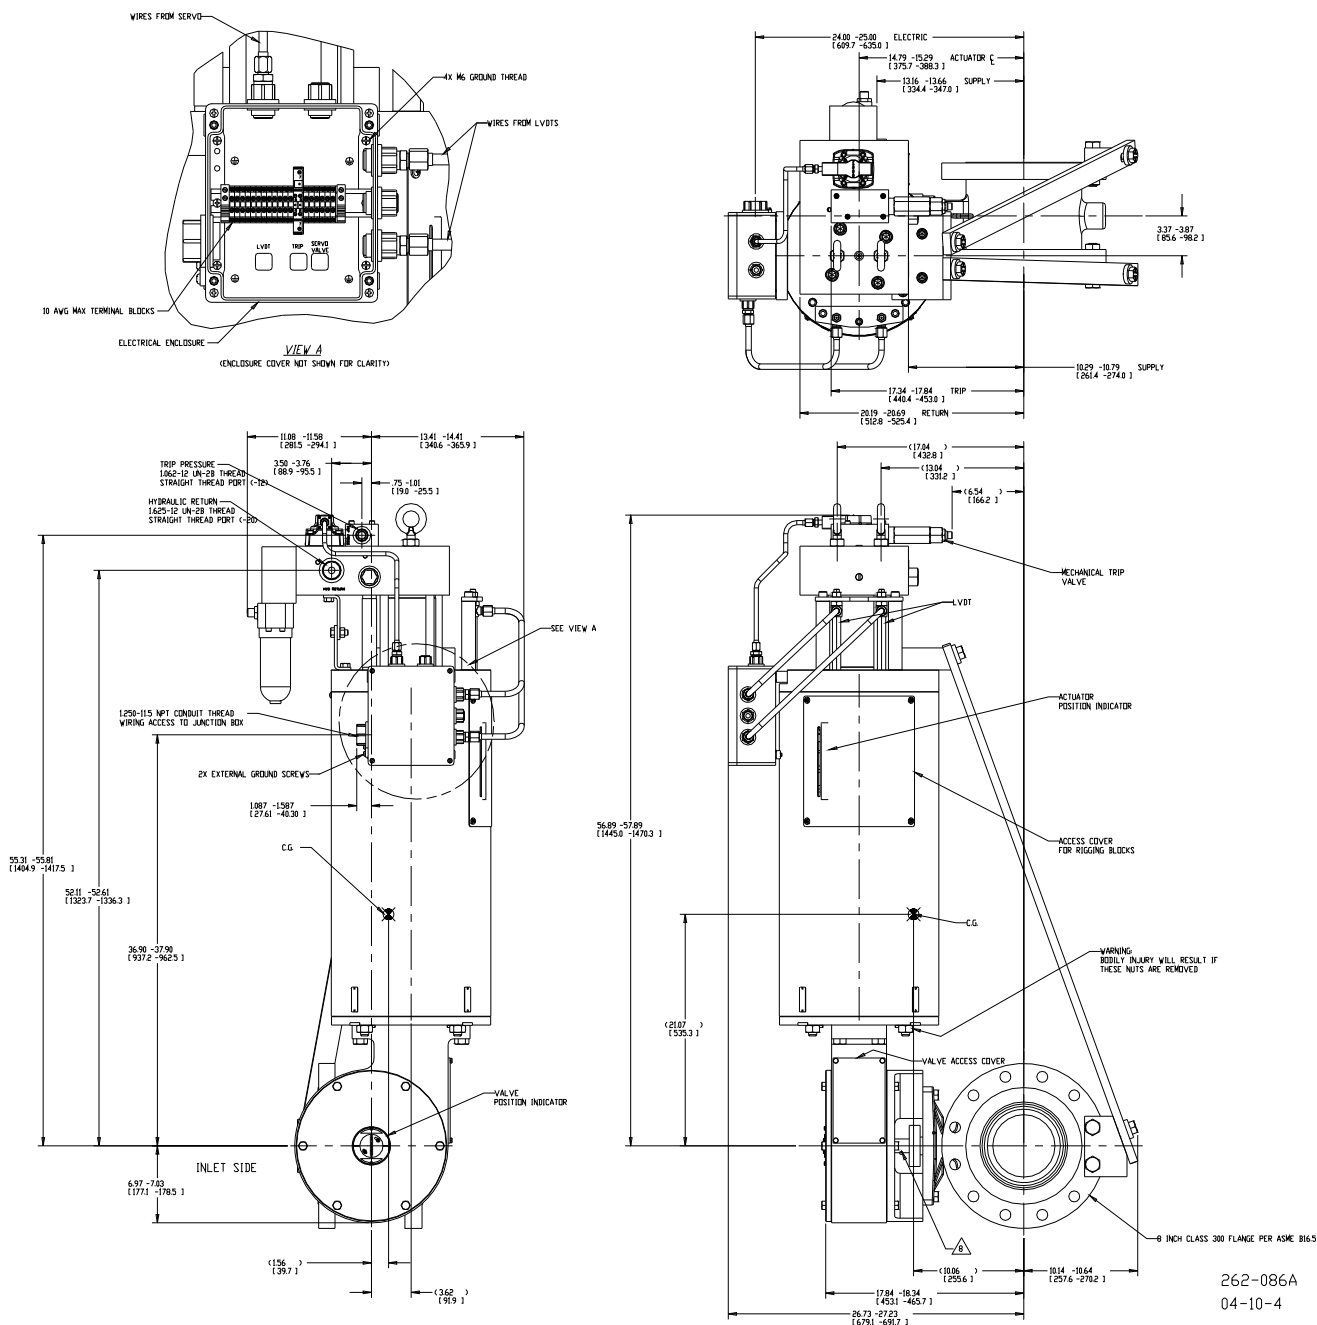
8-inch SS-260 Gas Stop/Ratio Valve Outline Drawing
